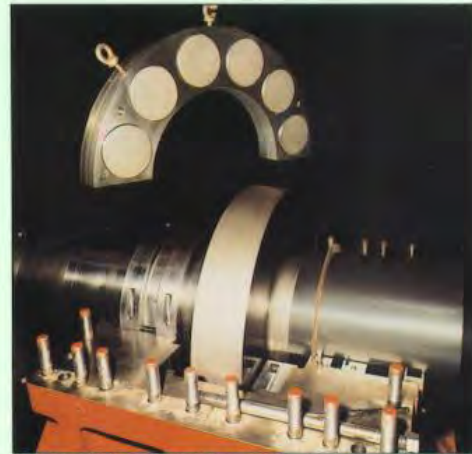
Fitting the thrust pads into the bearing shown in fig. 22.
